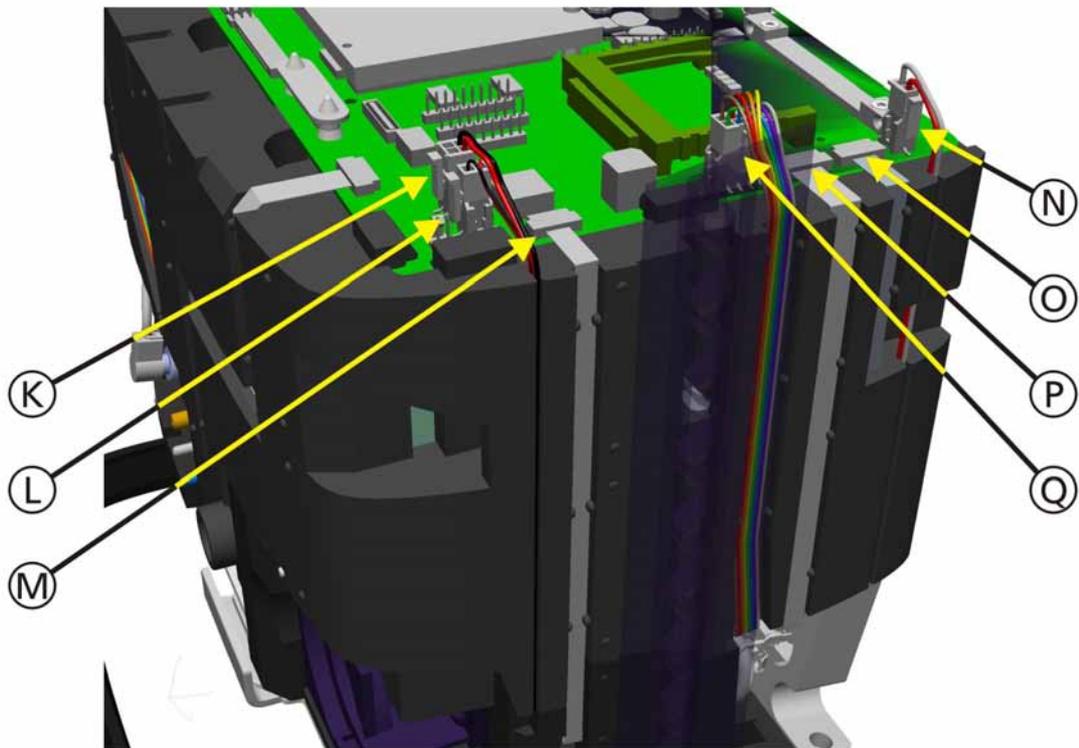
Top Foam Section and Mainboard Assembly, Step 5
